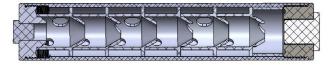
Illustrate the internal parts of a baffle type firearm suppressor
